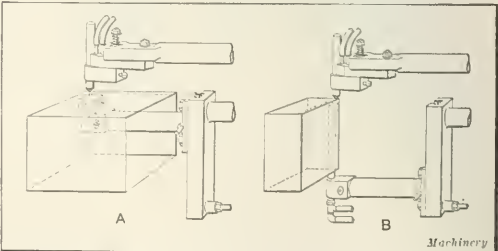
Diagram illustrating Two Different Types of Electrode Horns for welding Boxes
